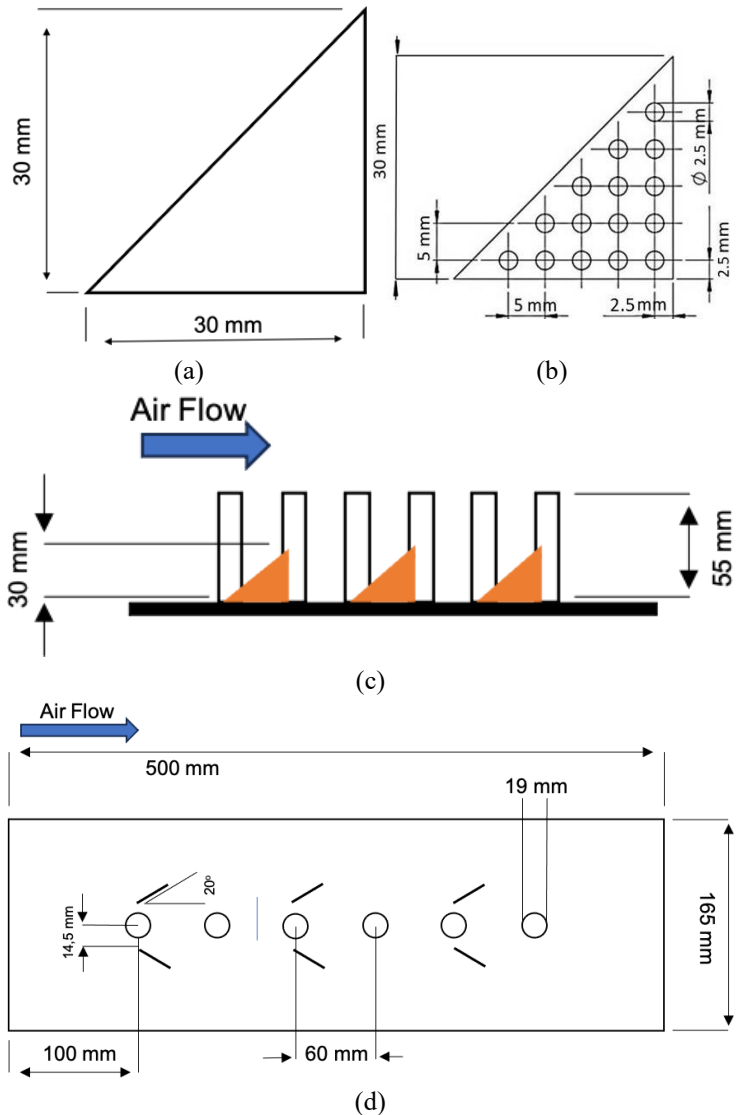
Geometry details. (a) side view of DWPs VGs, (b) side view of PDWPs VGs, (c) side view of test specimen, and (d) top view of in-line VGs.
